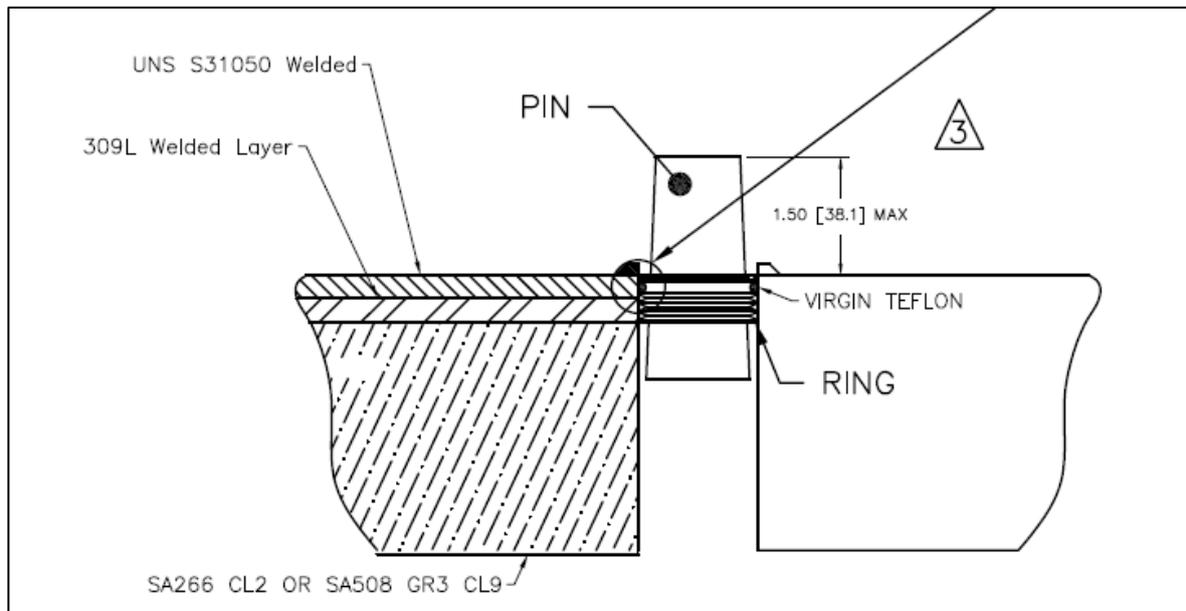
Typical Urea service Pop-A-Plug installation in weld clad overlay
